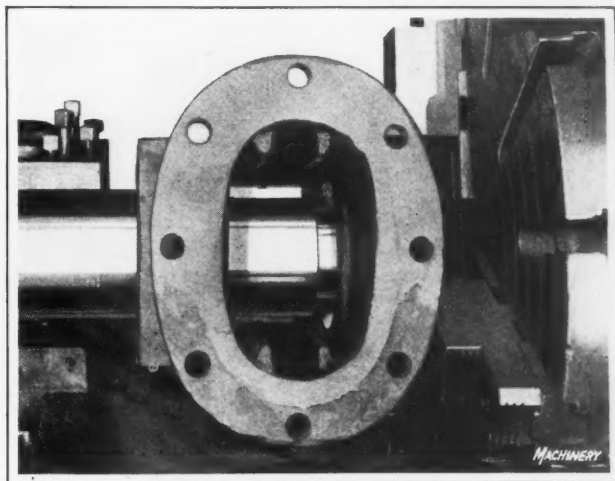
Close-up View of the Threading Operation which shows the Double Form of the Cutters
